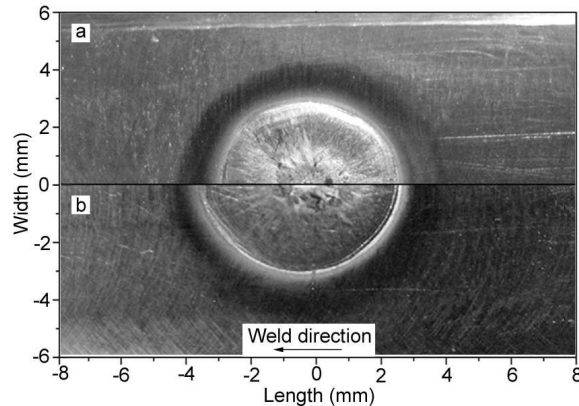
Experimental weld pool width for torch angles (a) 90° (b) 70°
